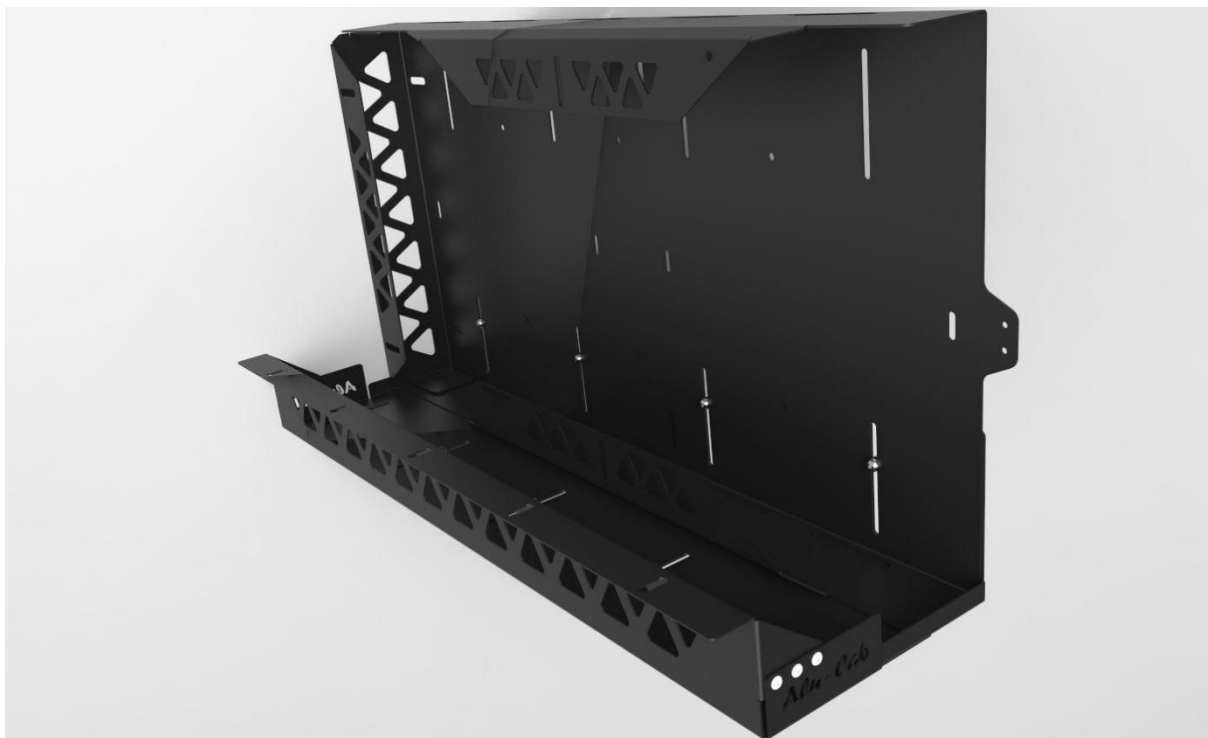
Fully Tightened Shelf, Shelf Mounting Bracket and Chair Carrier
